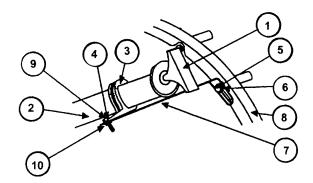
Oil Fill Tube Assembly and Oil Level Indicator (Dipstick). (Repeated).
